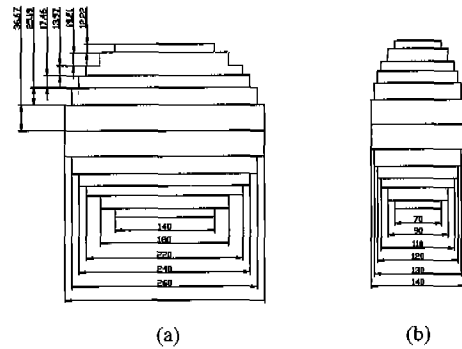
Configurations and dimensions of the cross section of the iron core (a) limb (b) yoke
